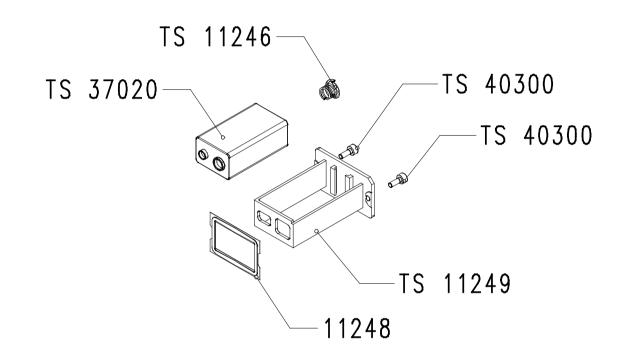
battery holder assembly TS 10189, details (the screws TS 40300 are not included in the TS 10189 assembly; they shall be ordered separately)
